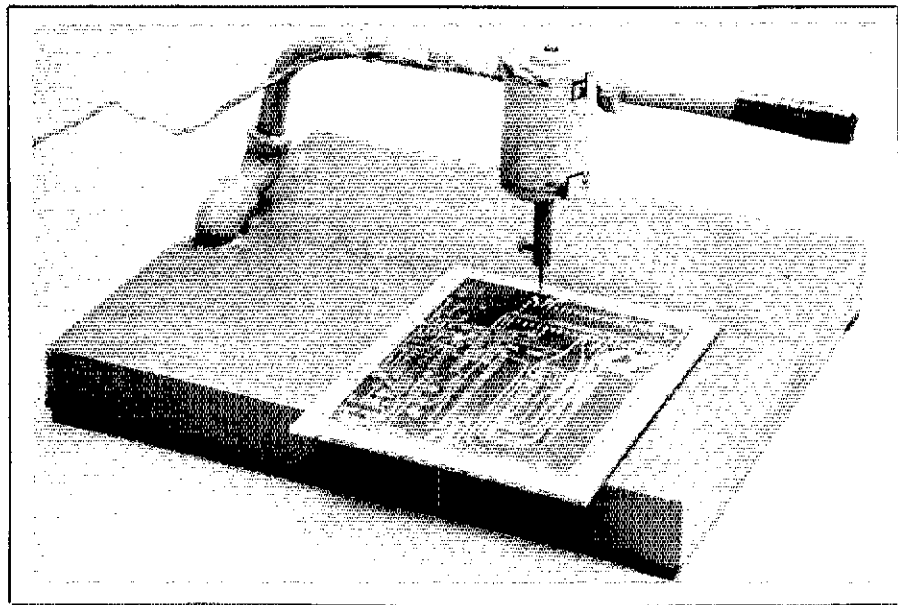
Photo of the pc-board drill press built by K4VIZ.
